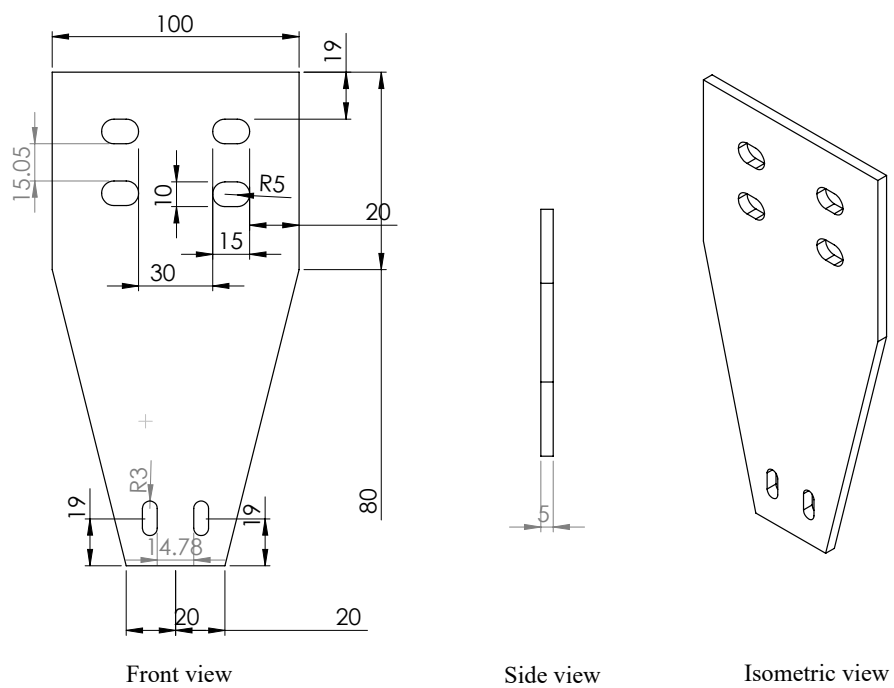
Shows indigenous design of connecting plates used in putting up cable trays together. All dimensions are in millimeter.
